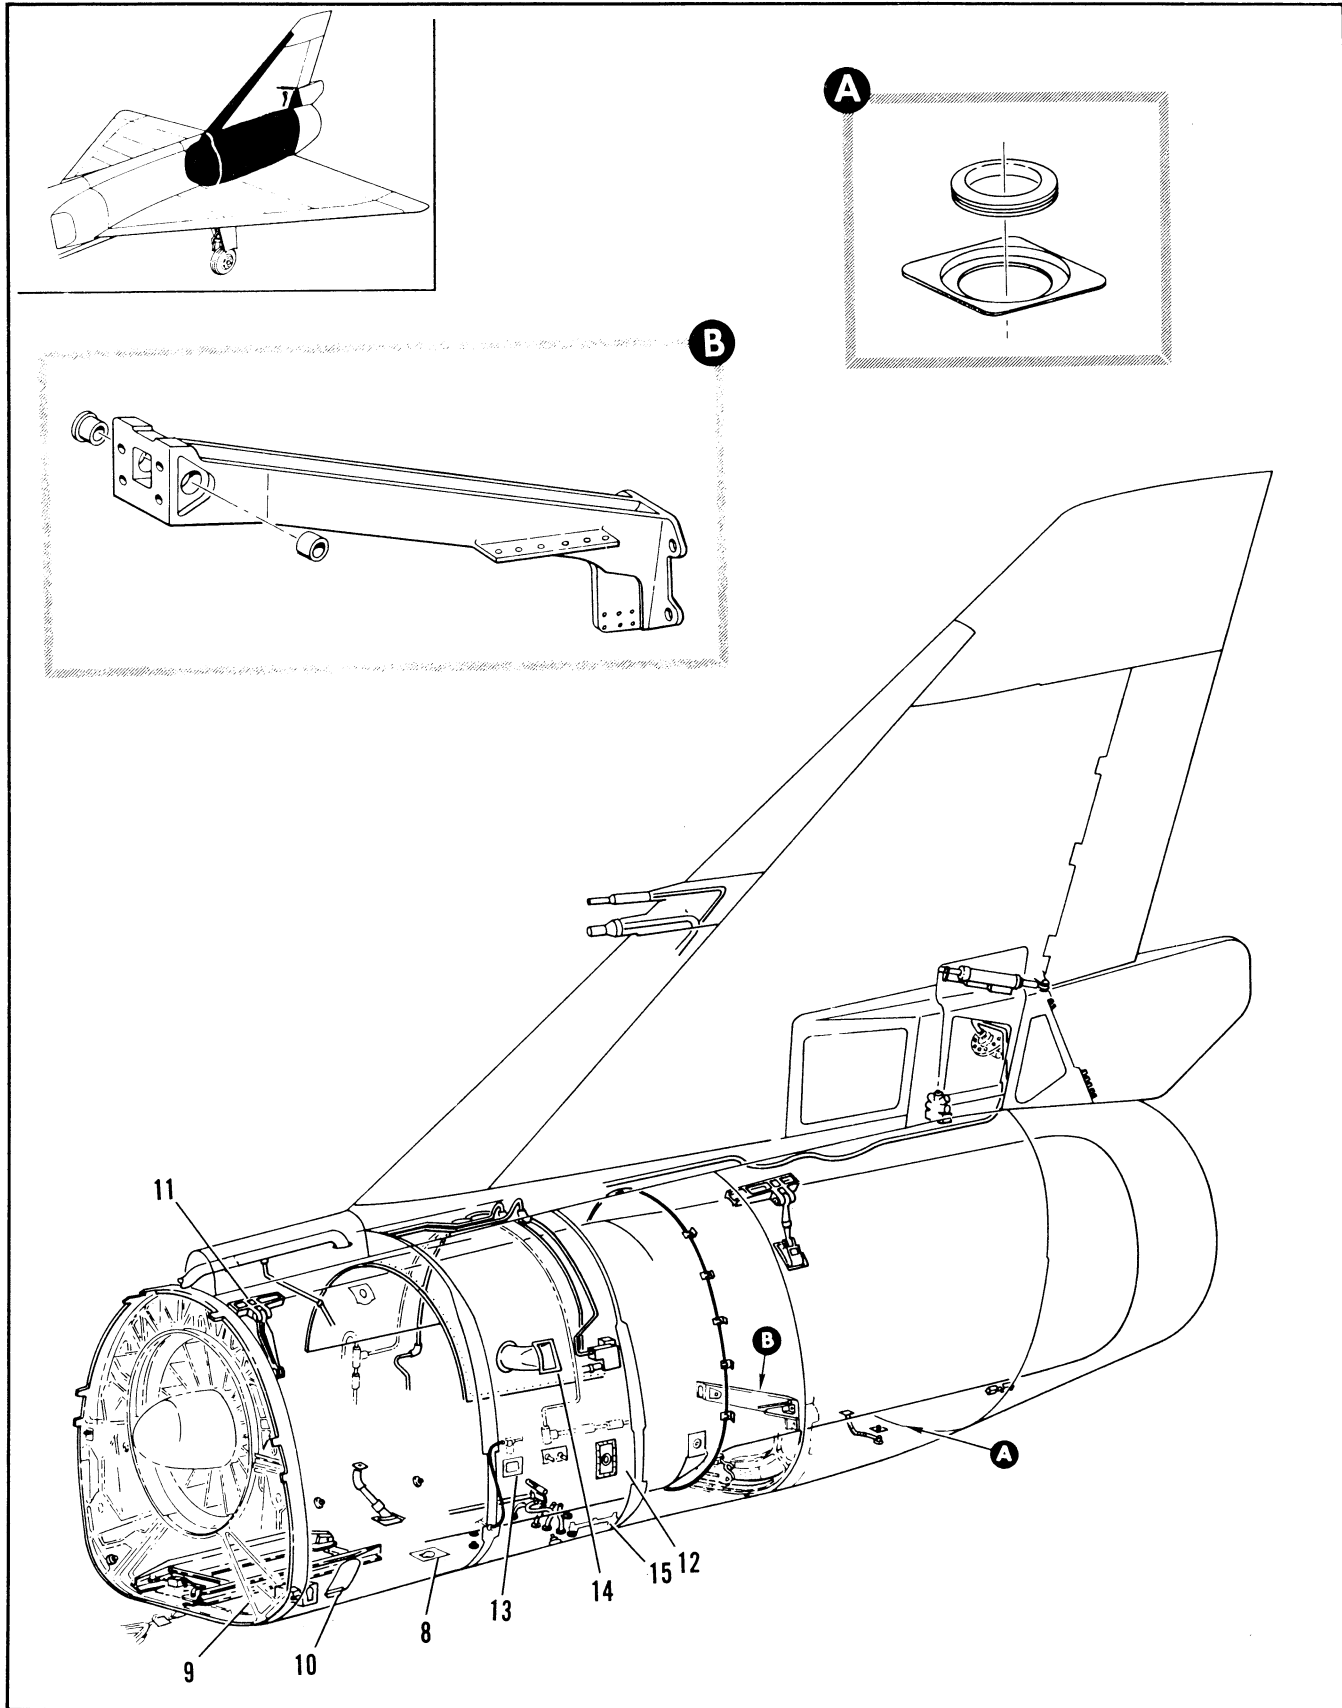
Fuselage Assembly Sta 472 to Tail Cone (Sheet 2 of 5)
